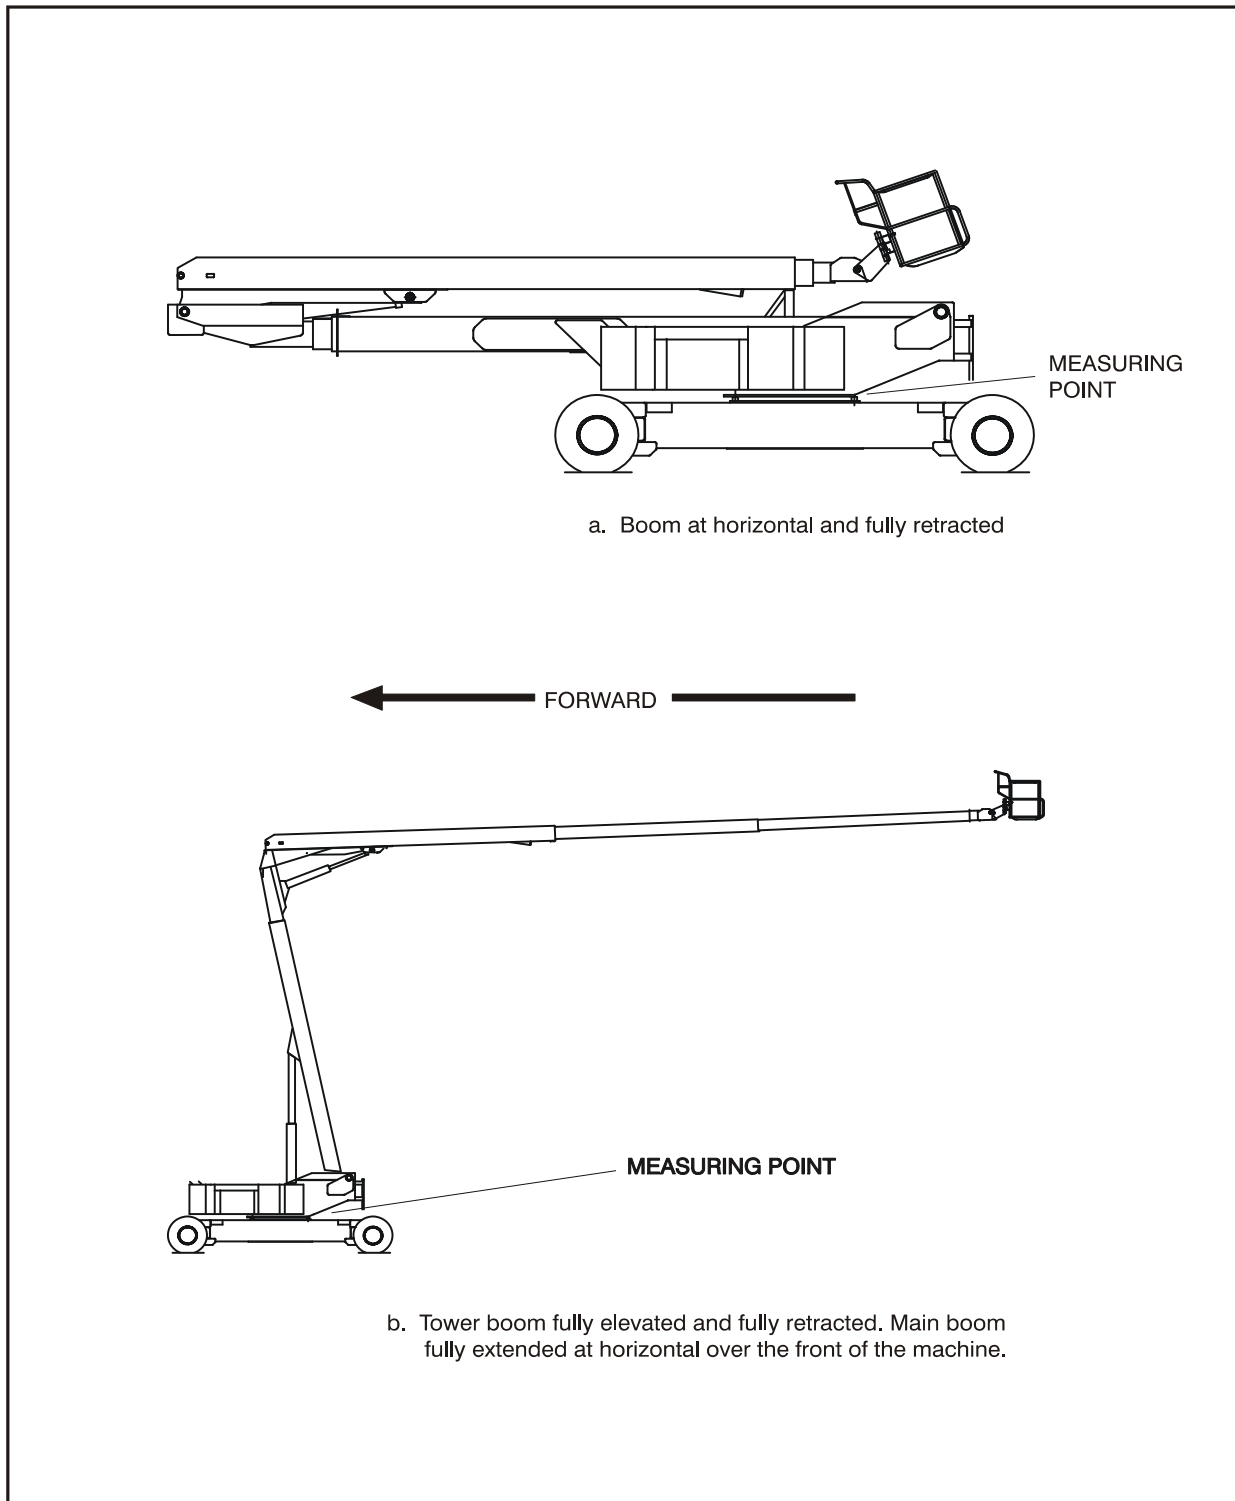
Swing Bearing Tolerance Boom Placement
